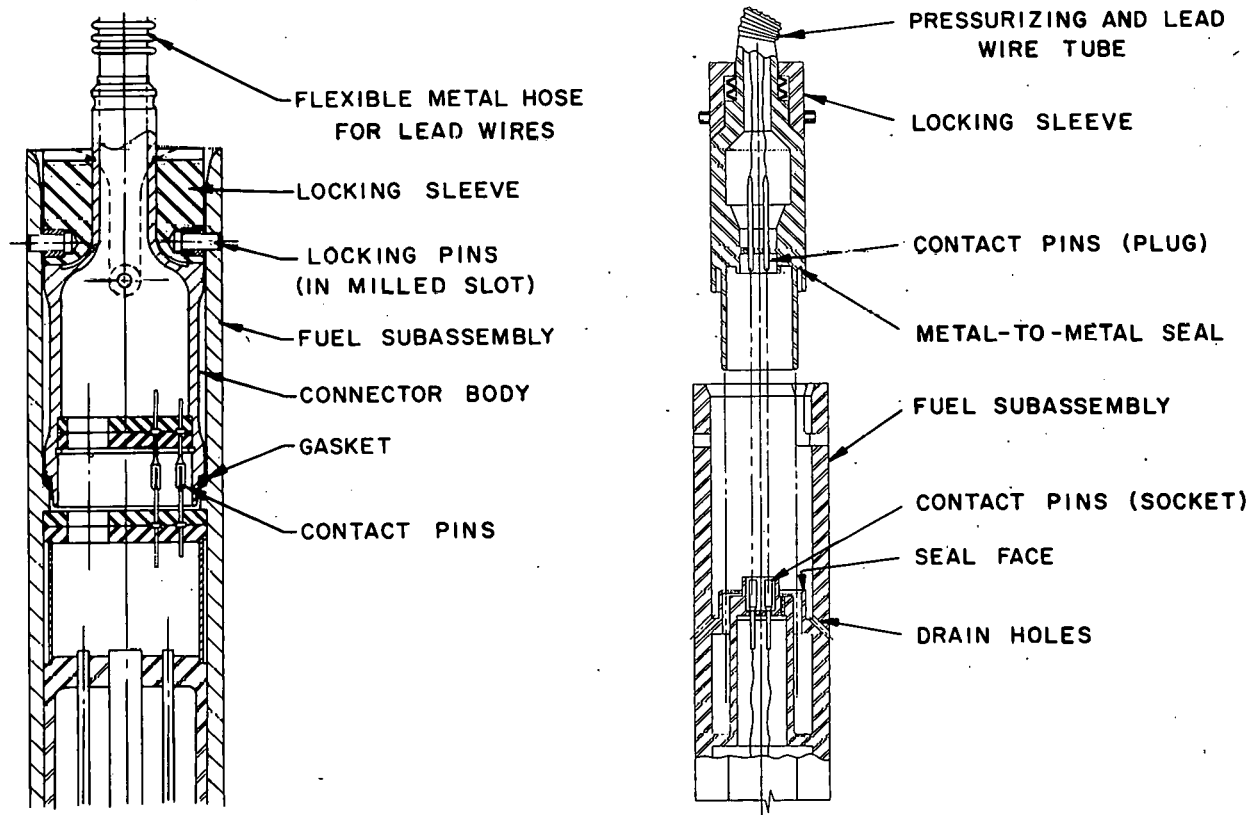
Prototypes of gasket-sealed and metal-to-metal sealed lead wire connectors for instrumented fuel subassemblies
